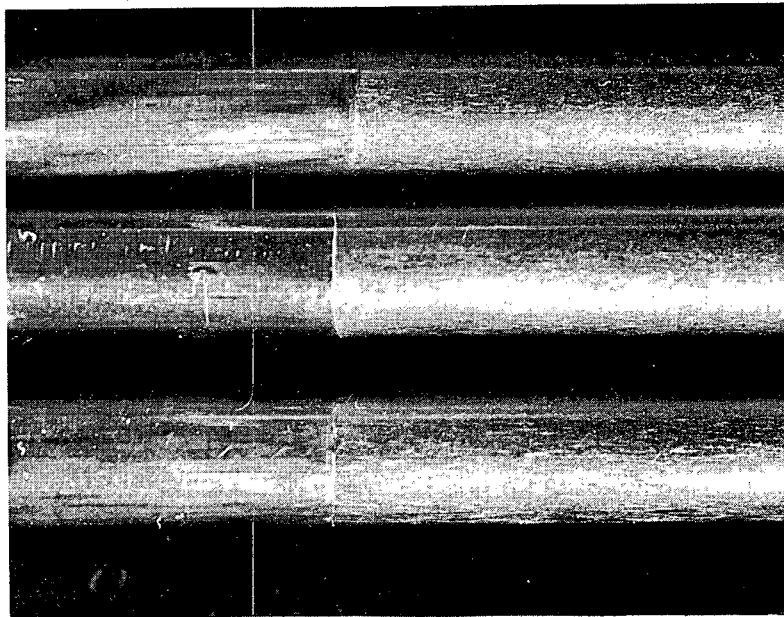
JOINT BETWEEN TYPE 304 STAINLESS STEEL END CAP AND FUEL-PIN SECTION OF SPECIMENS 20-1, -2, AND -3
